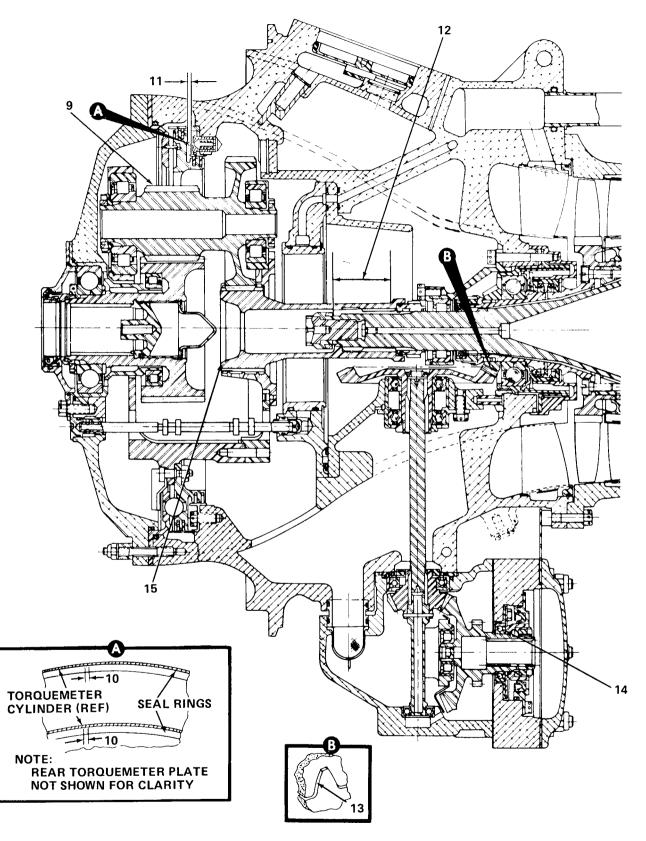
Fits, Clearances and Backlashes (T53-L-11 Series Engines) (Sheet 2 of 5)
